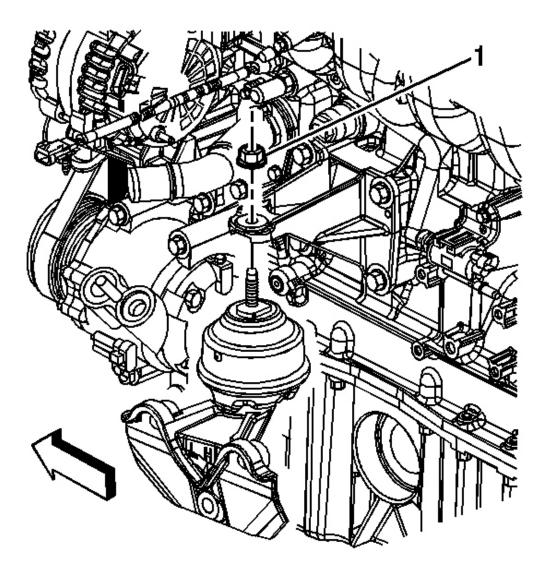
View Of Left Engine Mount Courtesy of GENERAL MOTORS CORP.
